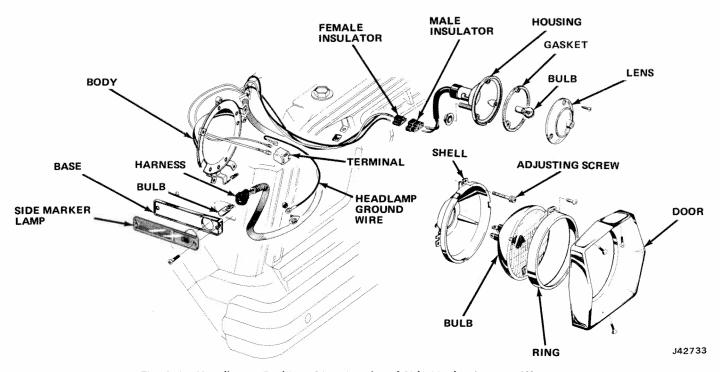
Headlamp, Parking, Directional and Side Marker Lamps - Wagoneer
